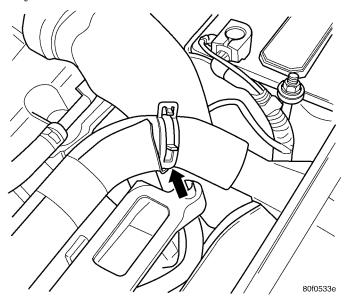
UPPER RADIATOR HOSE CLAMP - 2.4L TURBO
